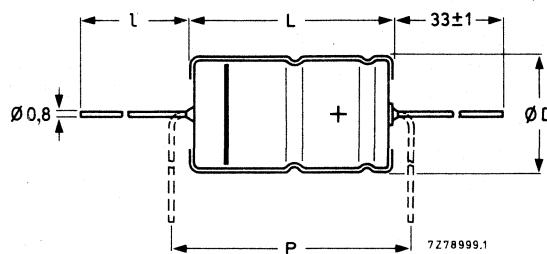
Style 1; see Table 1a for dimensions D, L, I and P.
